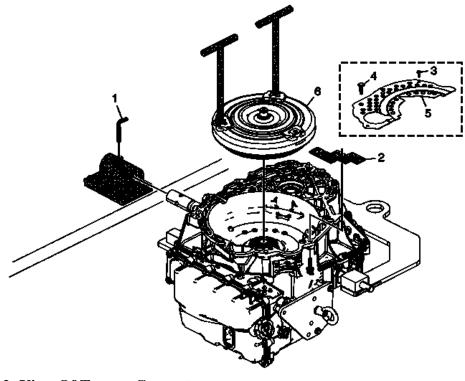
Identifying Lift Plate & Holding Fixture Courtesy of GENERAL MOTORS COMPANY
